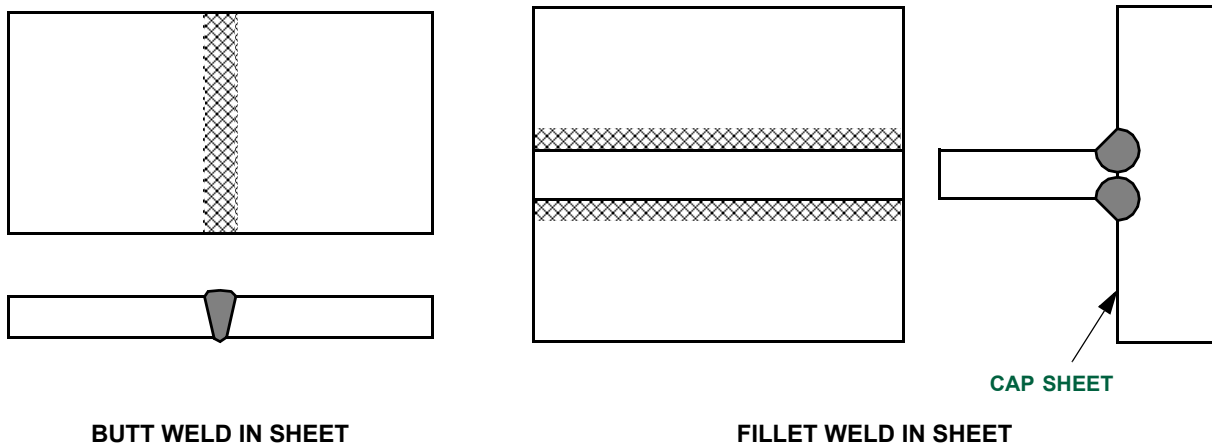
GENERAL DESCRIPTION OF WELD TEST JOINTS
